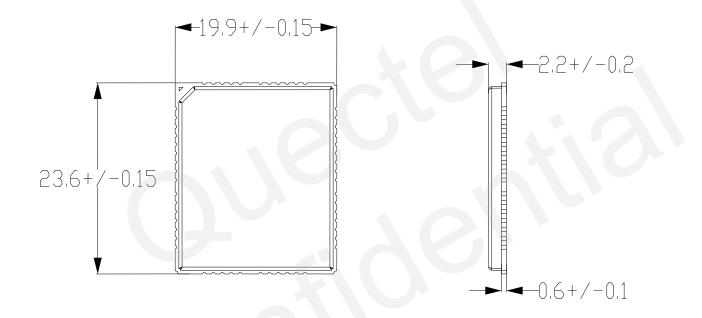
Top and Side Dimensions of BC95 Module (Unit: mm)
